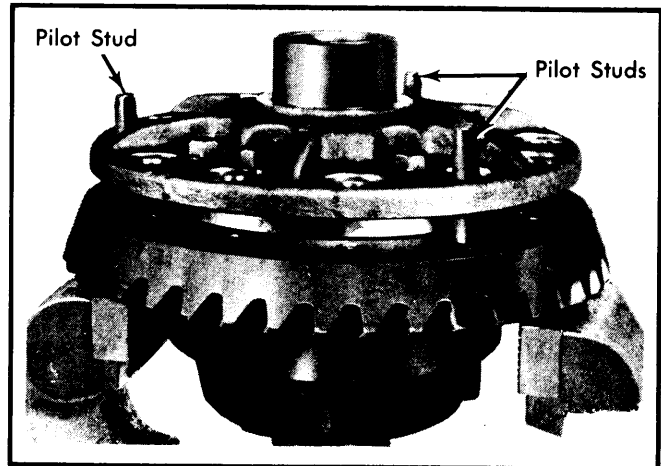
Using Pilot Studs to Locate Case to Heated Ring Gear
